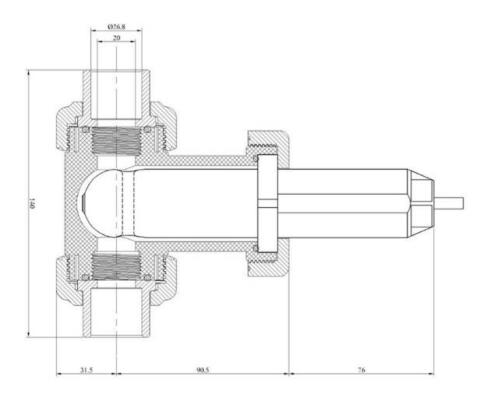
Dimension of the ST-588 and the ST-001 Tee Assembly (mm)
